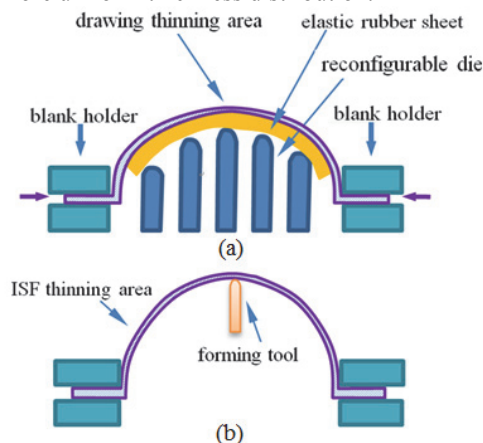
Hybrid forming process: (a) Multi-point preforming; (b) Incremental sheet final forming
